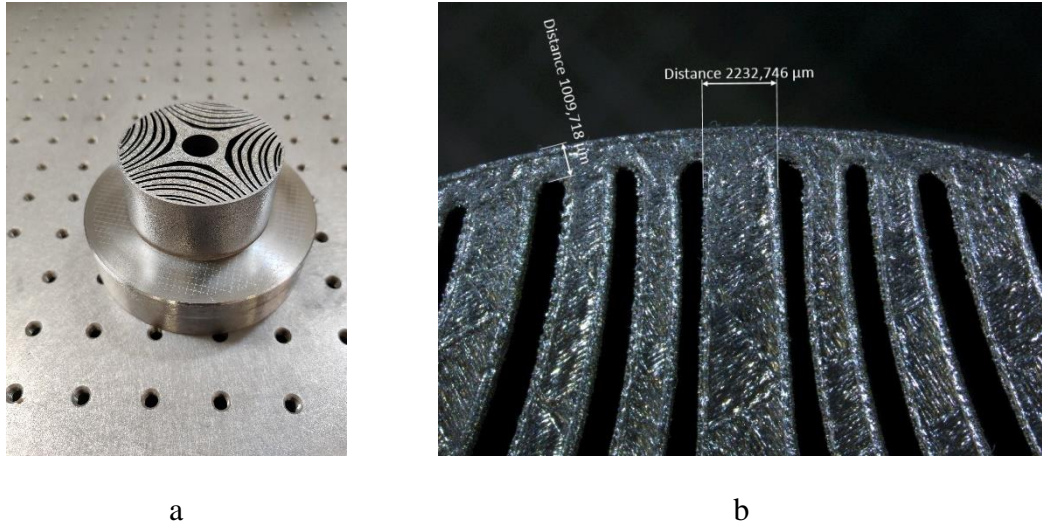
Prototype realization (a) and dimensional accuracy analysis (b)
